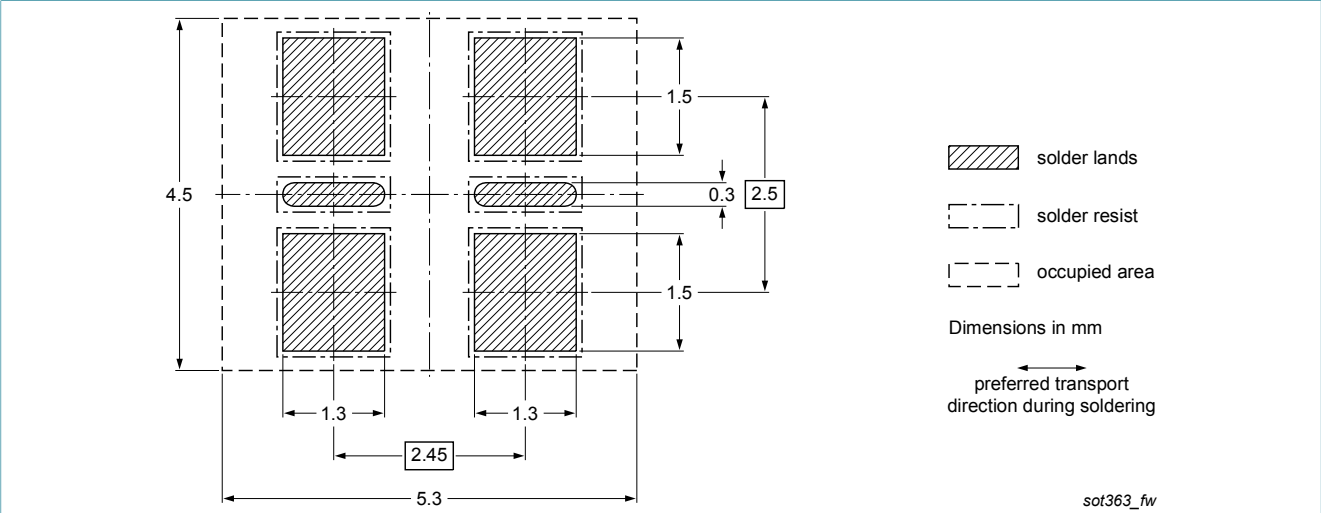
Wave soldering footprint for TSSOP6 (SOT363)
